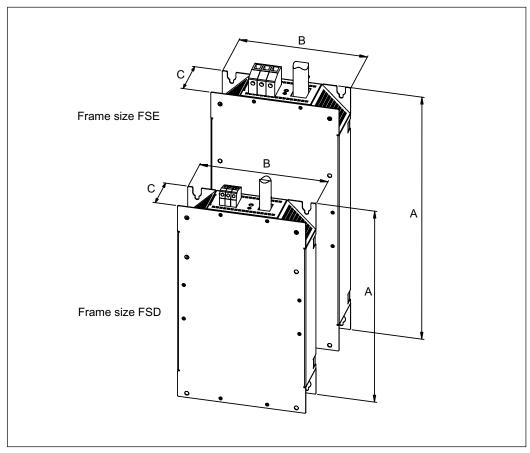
Dimension drawing: Line reactor, frame sizes FSD and FSE
